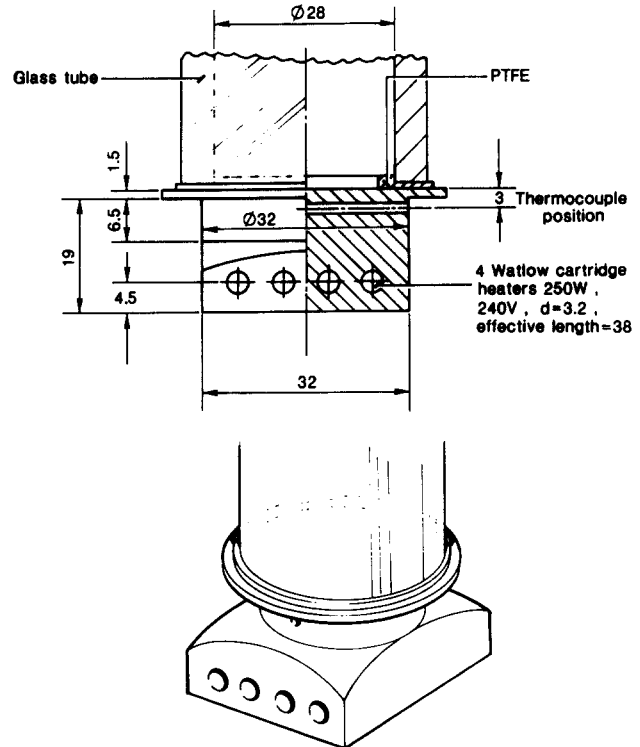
Apparatus used for the boiling measurements. Front view and section (above) and general appearance (below). Dimensions in millimeters
